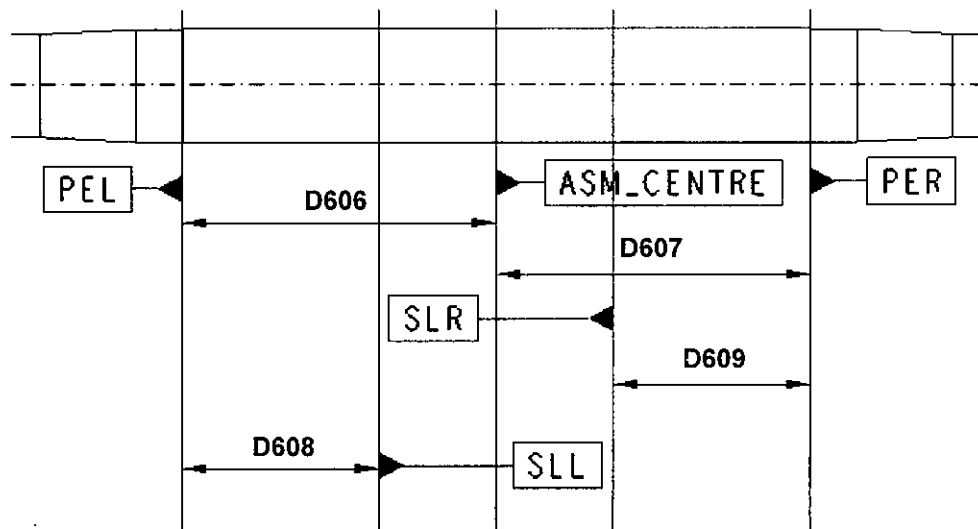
Relation for Sprocket Assembly Length of Drive Shaft
